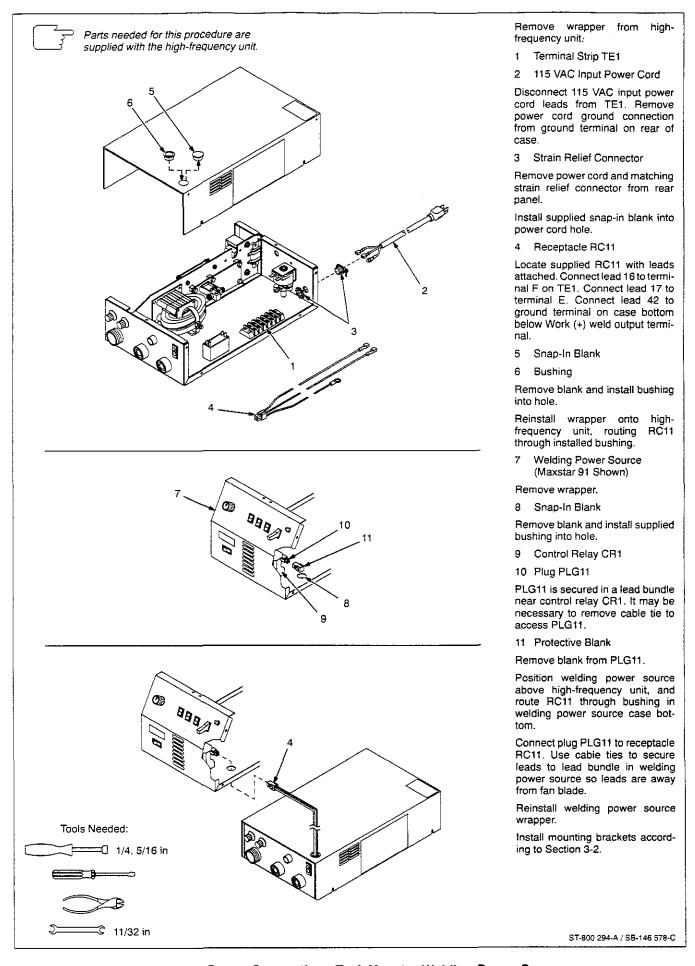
Power Connections To A Maxstar Welding Power Source
